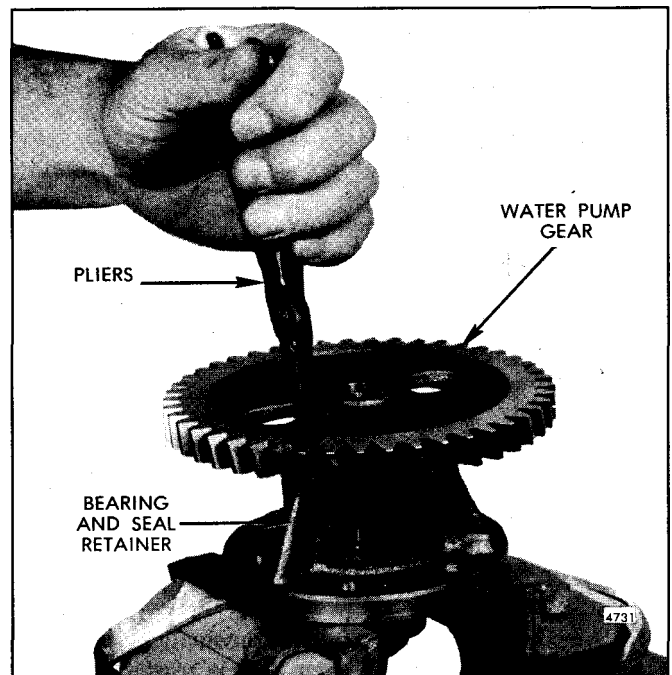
Removing Retaining Ring with Pliers J 4646
